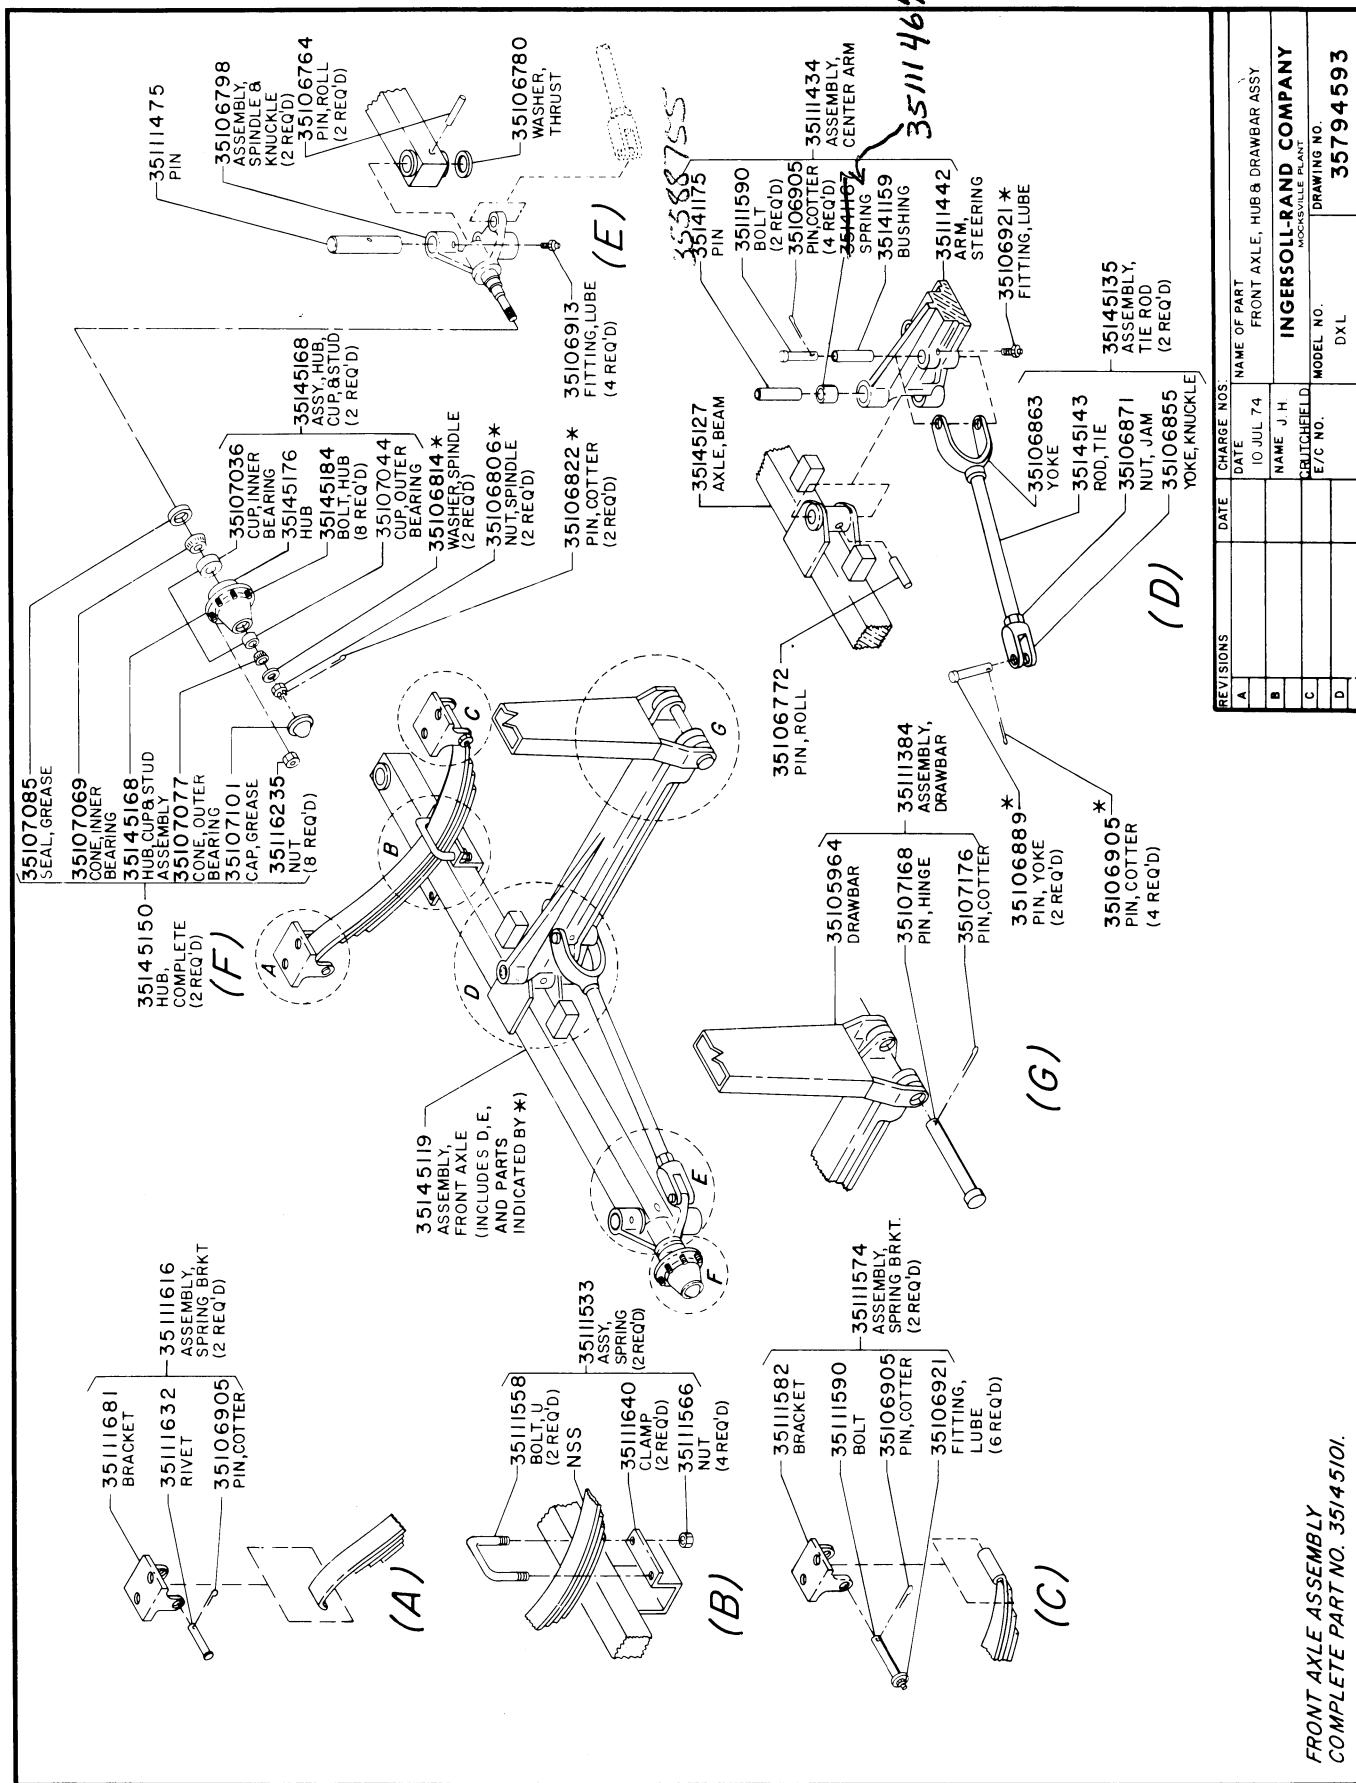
Front Axle, Hub and Drawbar Assembly
